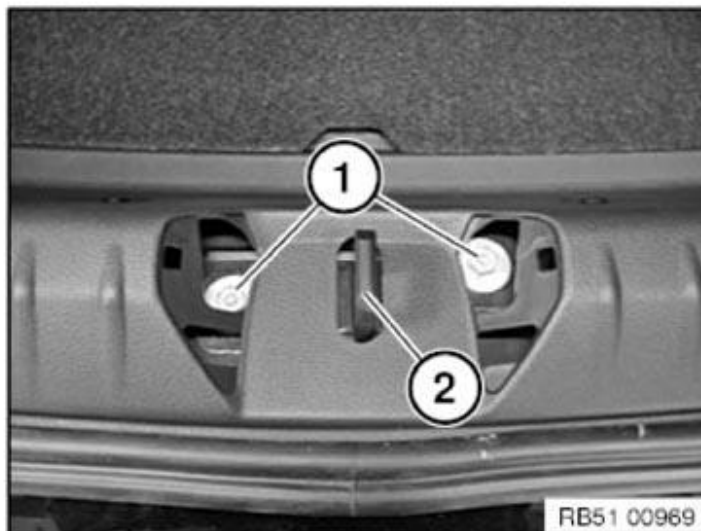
Lifting Out Covers Using Special Tool (00 9 322)
